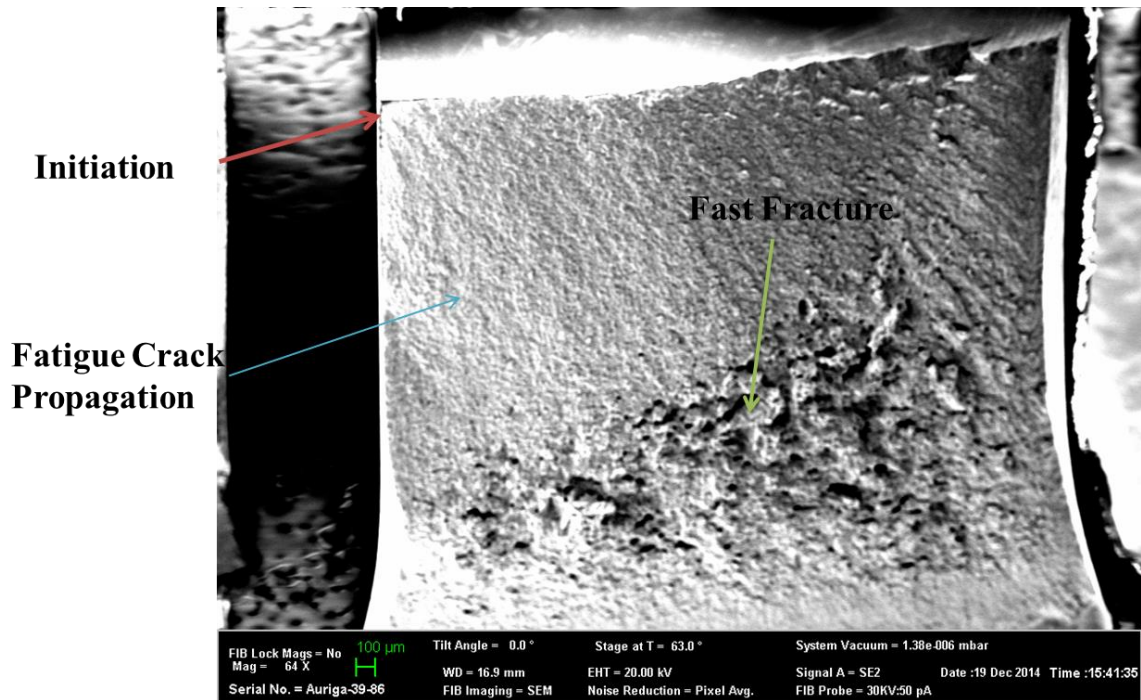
Fracture surface of an X70 weld four point bending fatigue sample (whole region)
